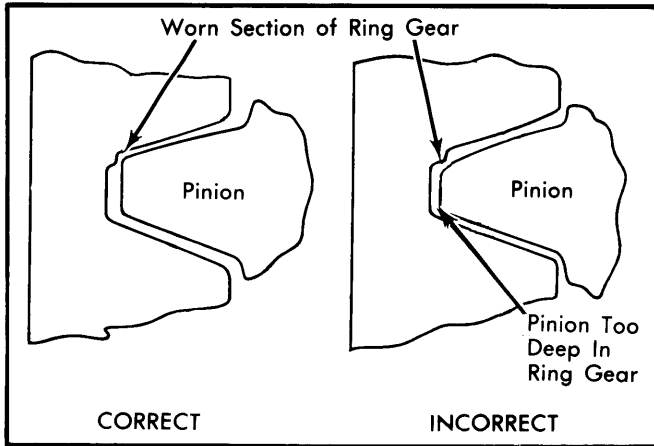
View Showing Correct & Incorrect Methods of Installing Worn Gears
